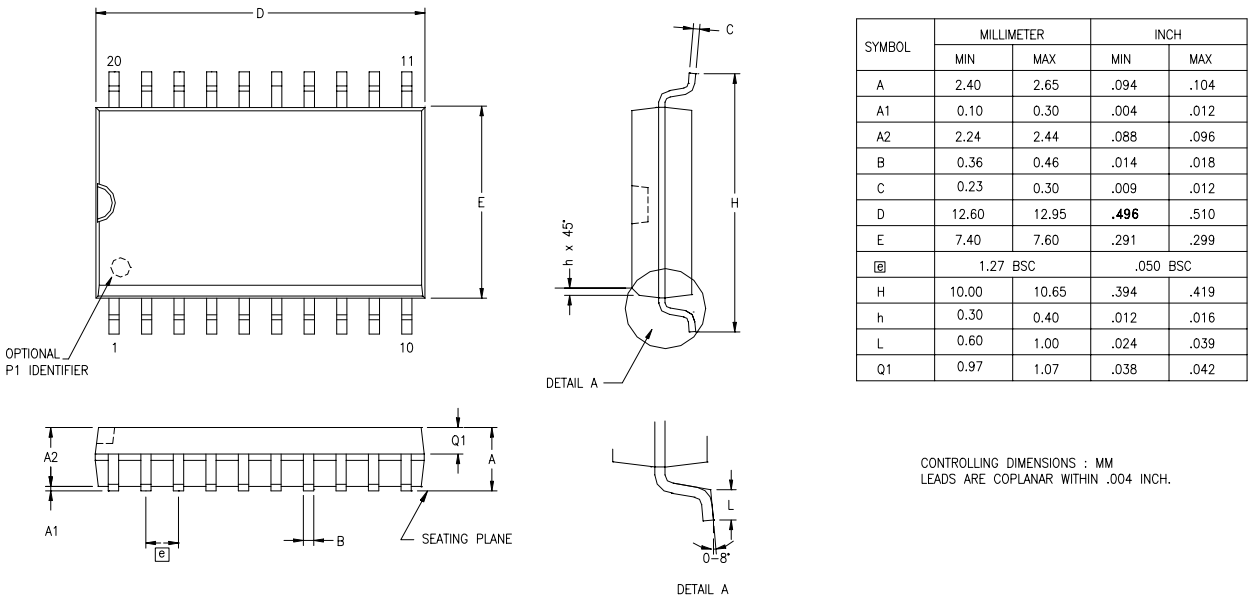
20-Pin Small Outline Integrated Circuit Package (SOIC)
